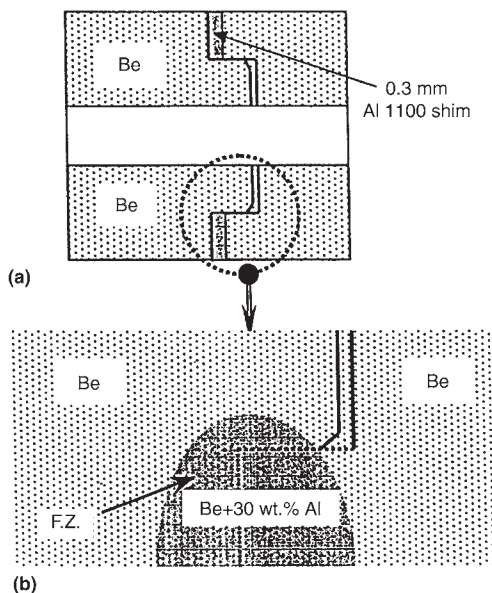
Schematic sketch of joint design. (a) Before welding. (b) Enlargement of fusion zone (FZ) following welding. Source: Banaim et al. 1998
